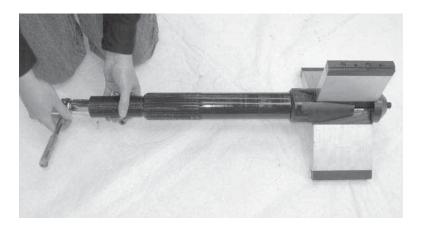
Turn the drawbar nut counter-clockwise to retract the clamping legs.
